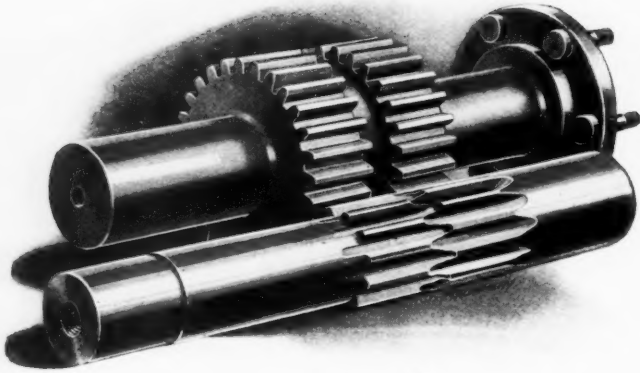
Close View of Staggered Tooth Construction on Saw and Gear Arbors
